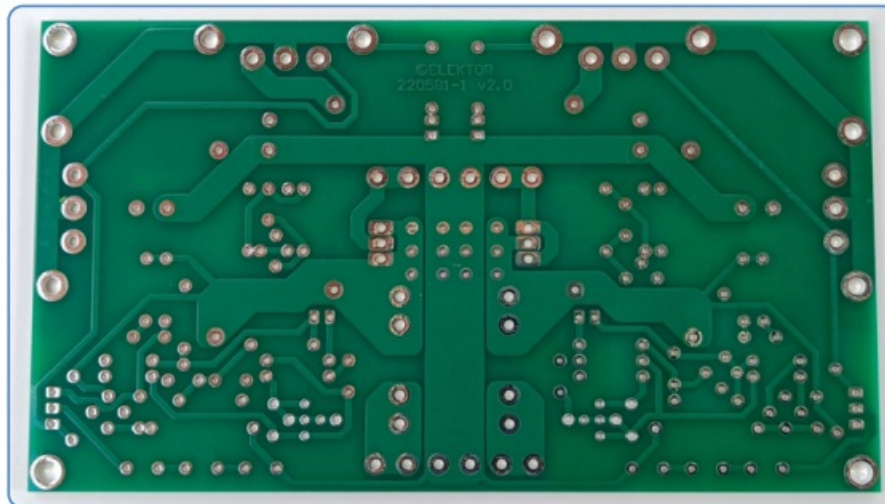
Bottom side of the PCB no. 220581-1 v2.0.
